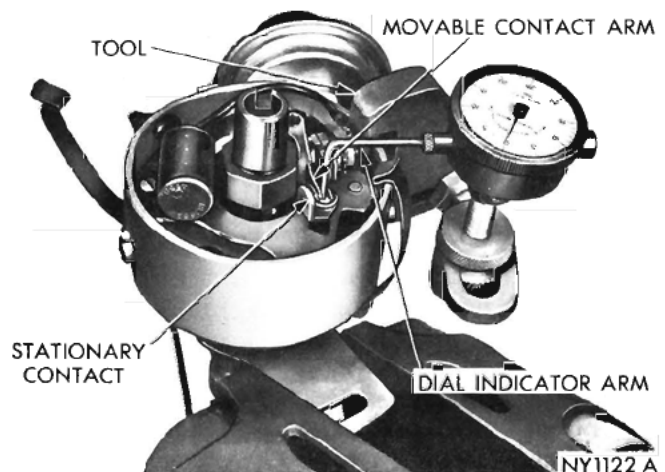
Adjusting Point Clearance with Indicator (Typical)
